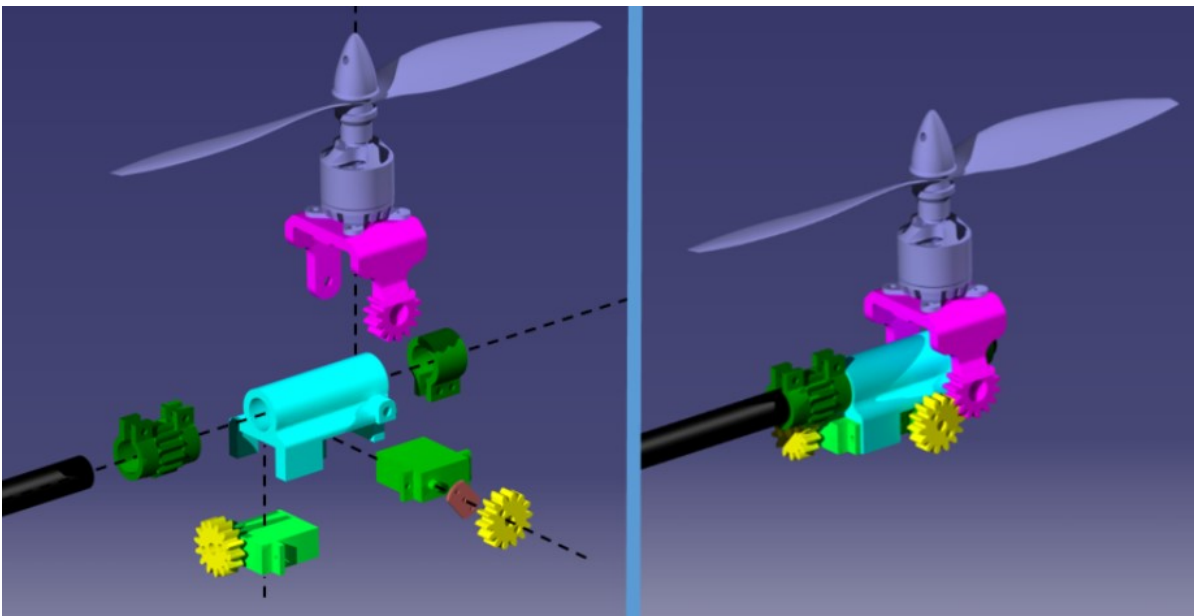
Render of the tilting mechanism, exploded view on the right side and isometric view on the left side.
